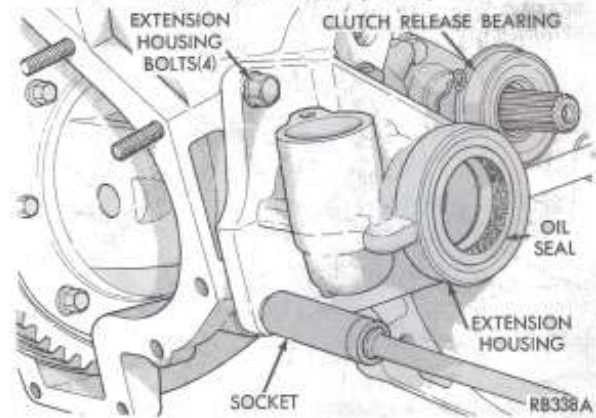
Remove or Install Extension Housing Bolts (A-525)
